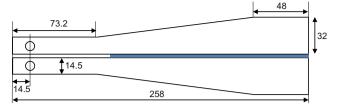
Geometry of TDCB specimen (dimensions in mm).
